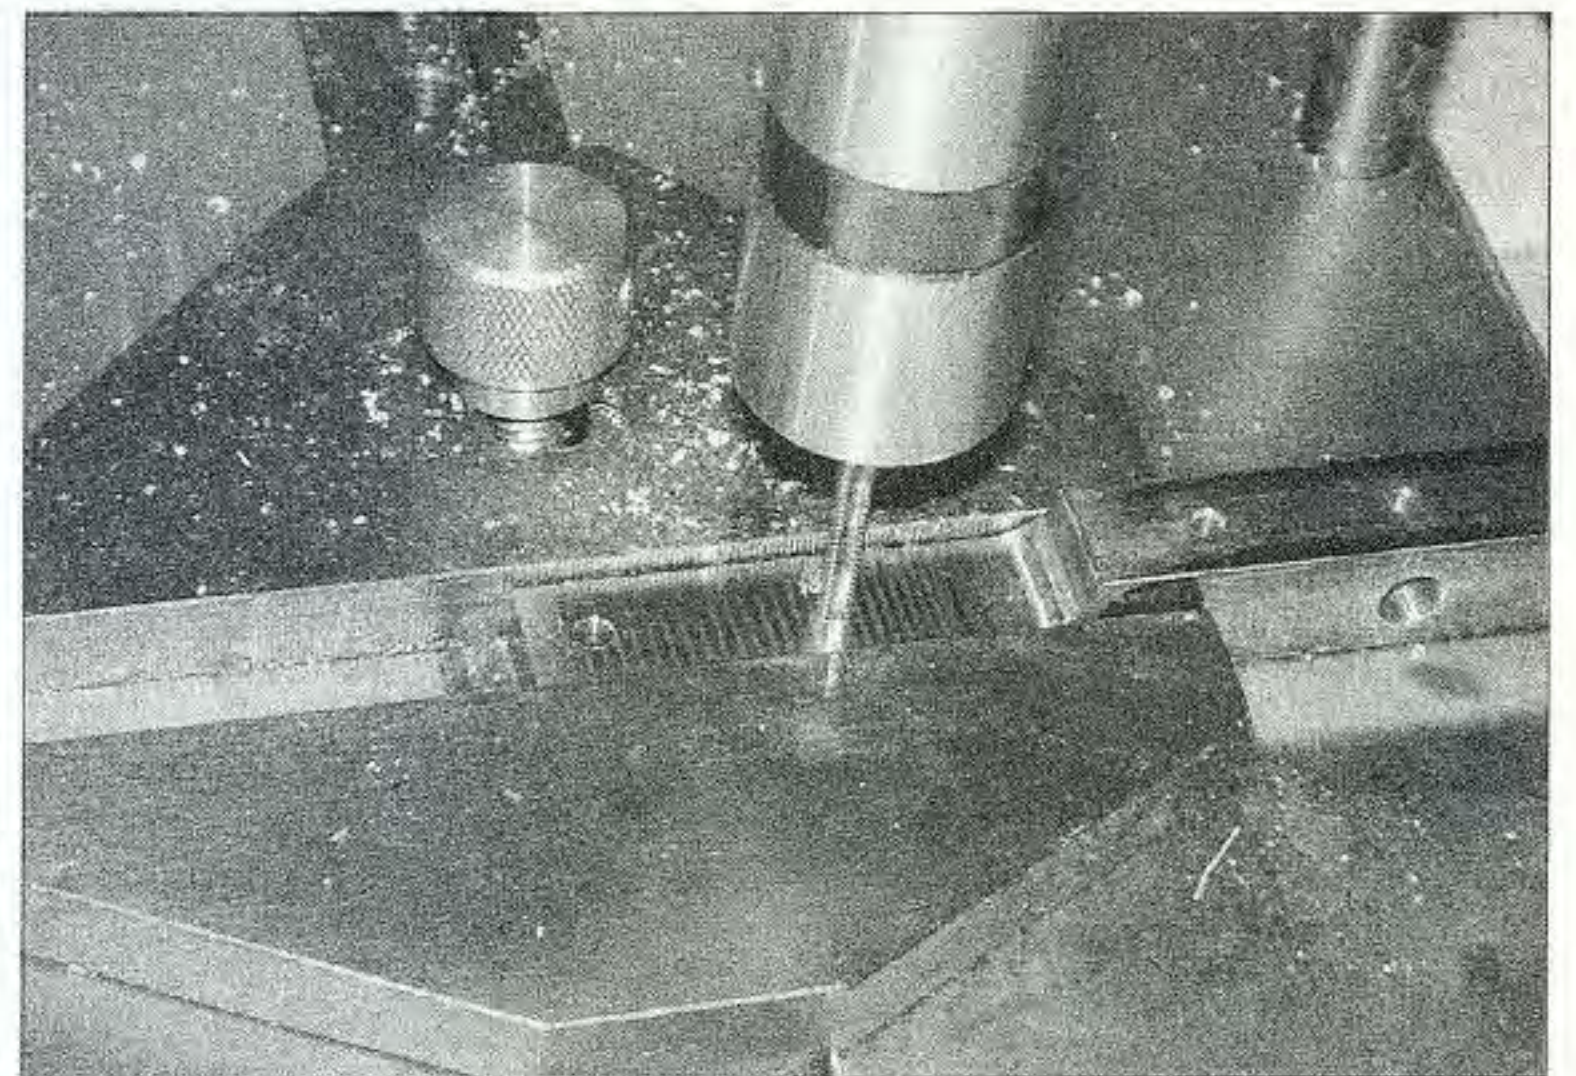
Photo F. Using a hand tapping machine to tap the threaded holes in the armature.
